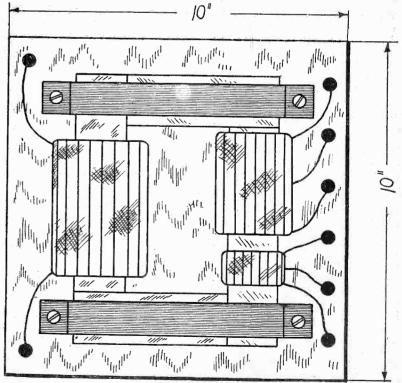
Top view of the completed transformer showing location of binding posts and also the final placement of the coils.
